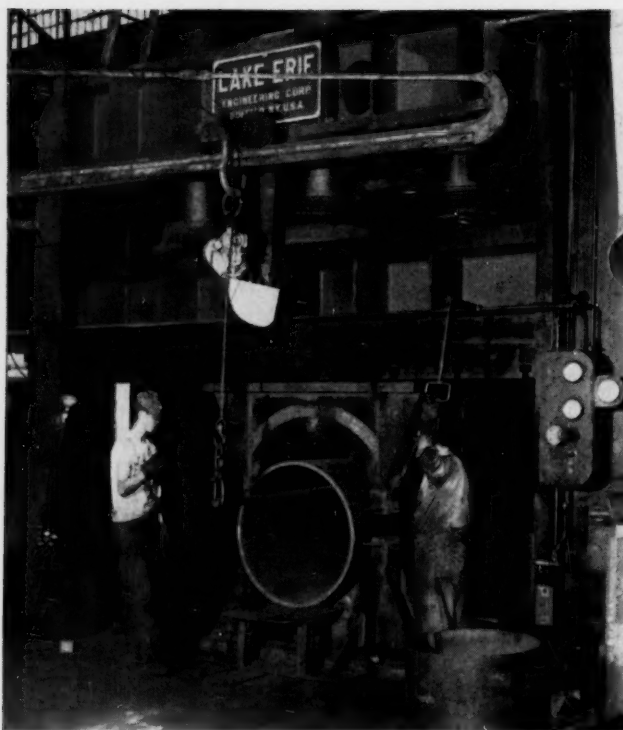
Before the longitudinal weld is made, a rounding die in this press gives the shell its final shape, and tacking is done after the edges are brought close together.
